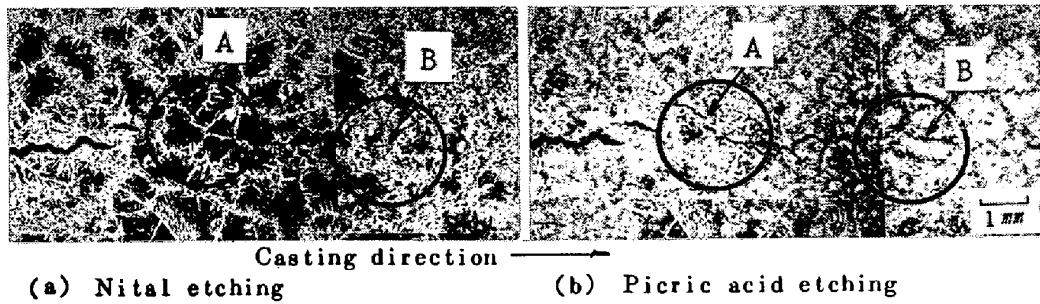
Enlarged picture of crack end of "A" and "B" parts shown in Photo 5. (4.5 mm below surface)
